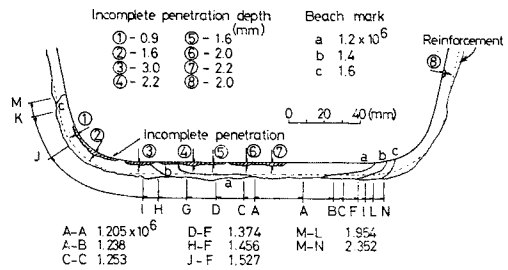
Sketch of fatigue fracture surface (side A of No. 26 specimen).
